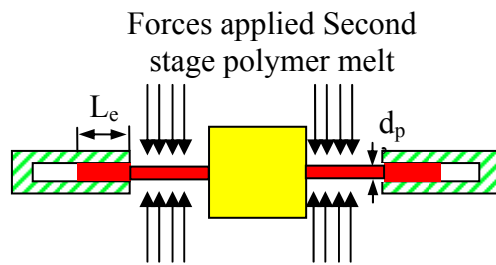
Mold design strategy for creating mesoscale in-mold assembled revolute joints
